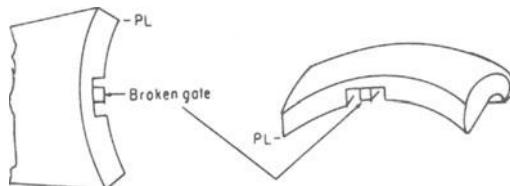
Gate breaking and clipping are low-cost removal methods when the part design permits locating a recessed gate in a hidden area, as in this handle. This type of problem is eliminated by using hot-runner molds for TPs or cold-runner molds for TSs.
